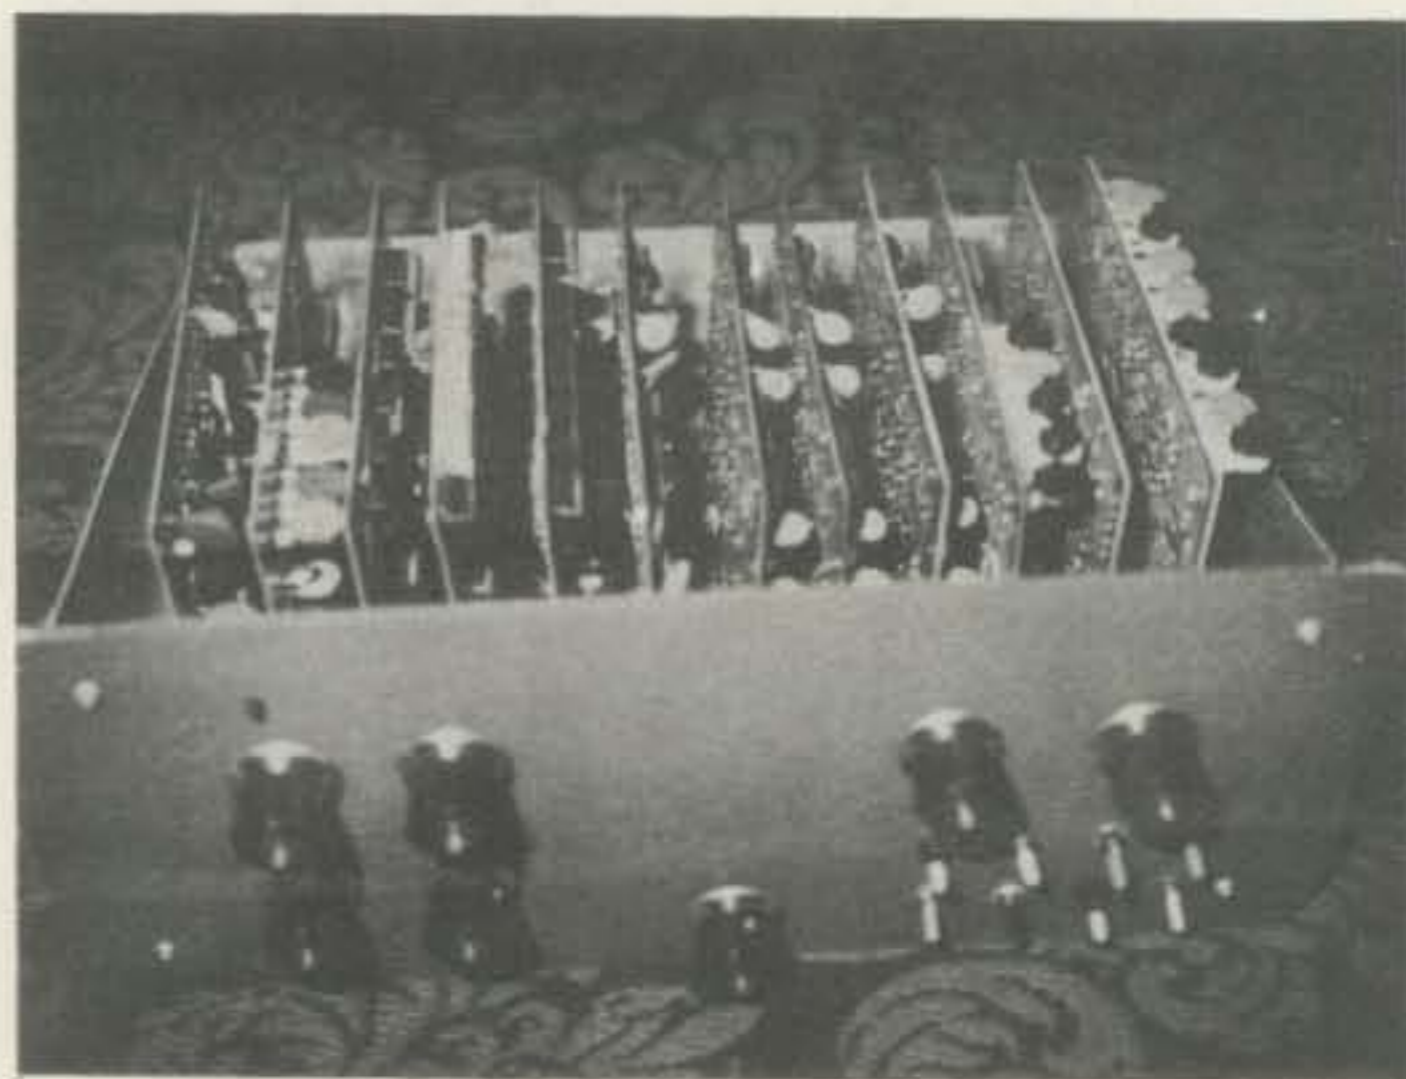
Completed assembly of WB9LVI scan converter using U channel aluminum sections and sheet metal rear deck.
